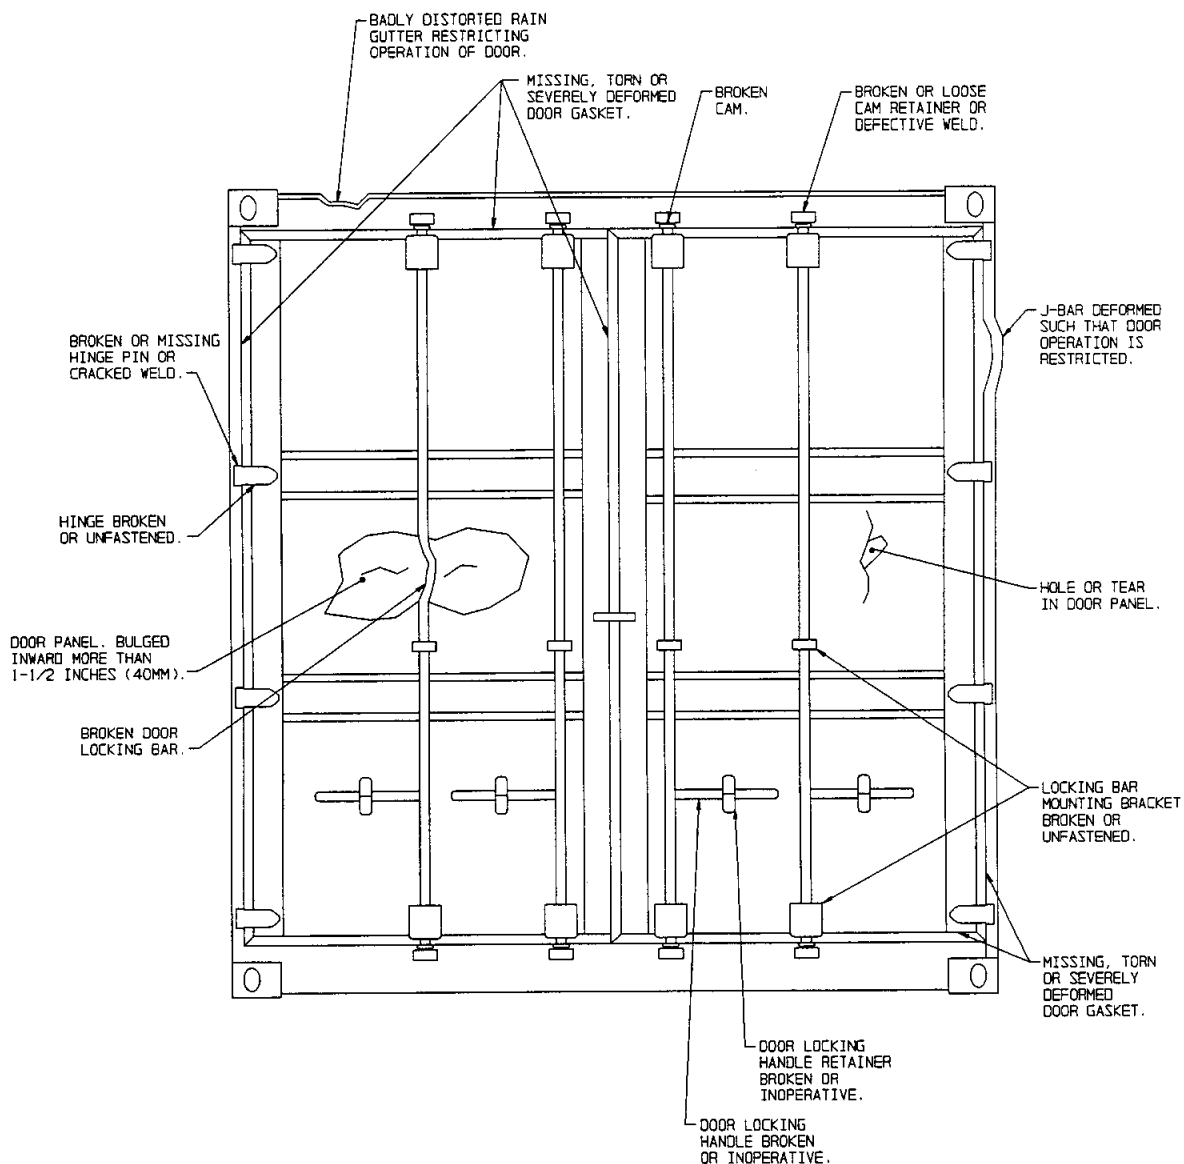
A - REAR END DOOR ASSEMBLY DAMAGE
